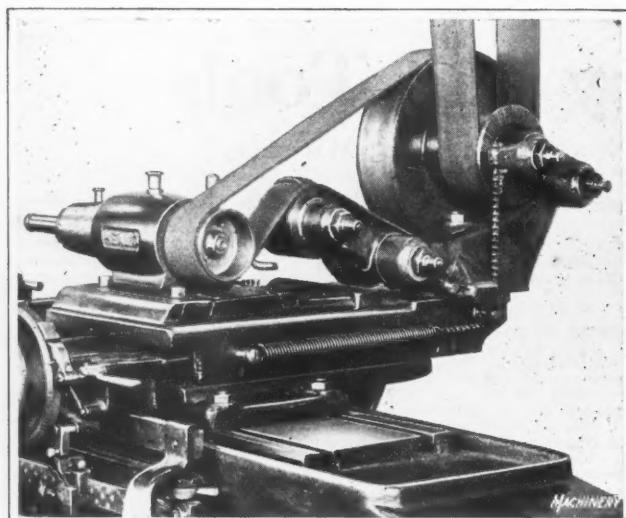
Close-up View of Wheel-head provided with New Type of Idler Drive
